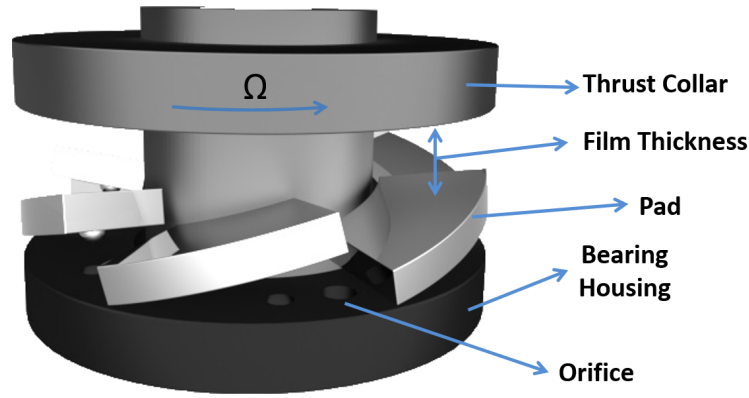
Schematic view of a tilting pad thrust bearing (film thickness and pad tilts exaggerated). Reprinted with permission from [2].
